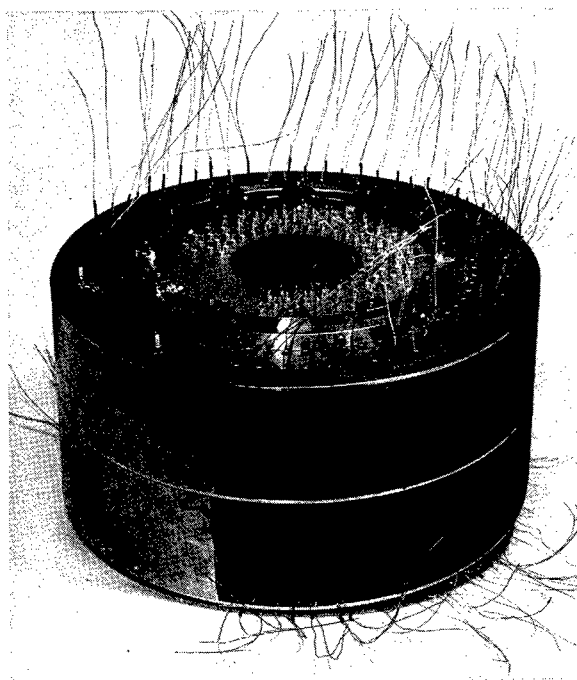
Assembly of stacks on spool, terminal board in place, HP-8D transducer.
